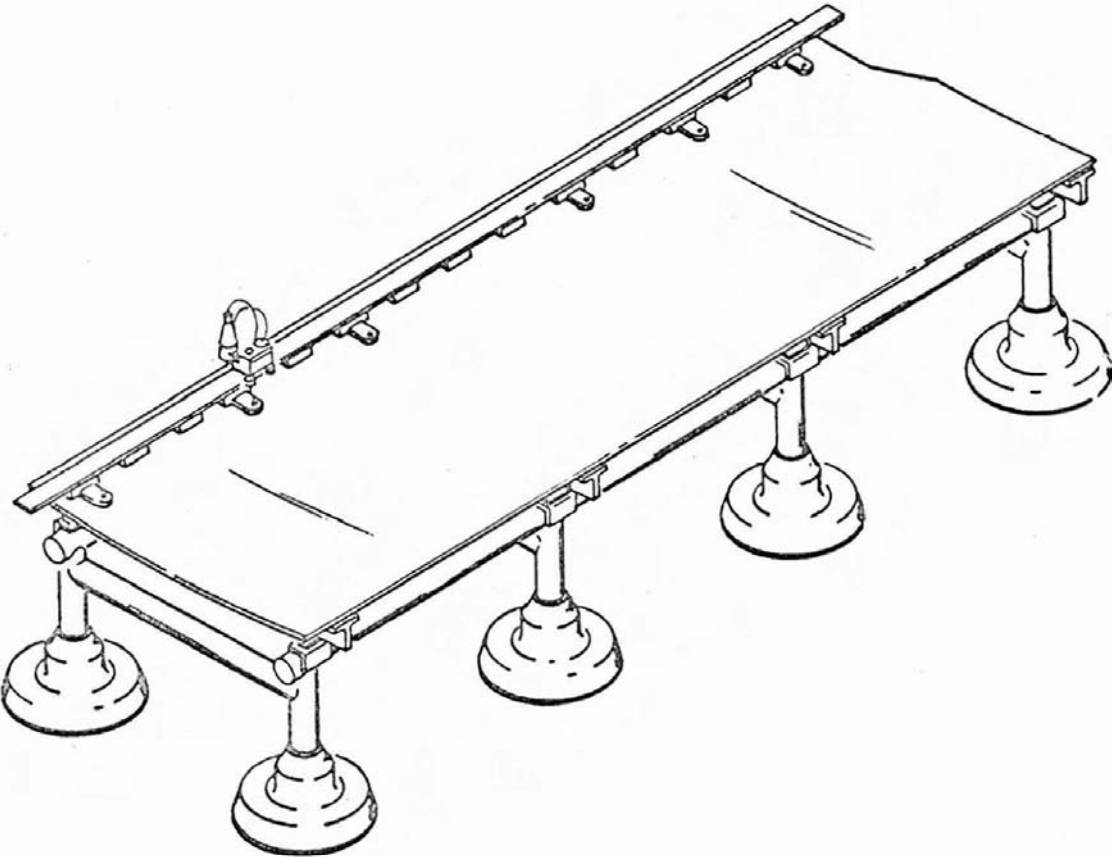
Skin Panel Assemblies Trim Fixture TmF-335-18300
